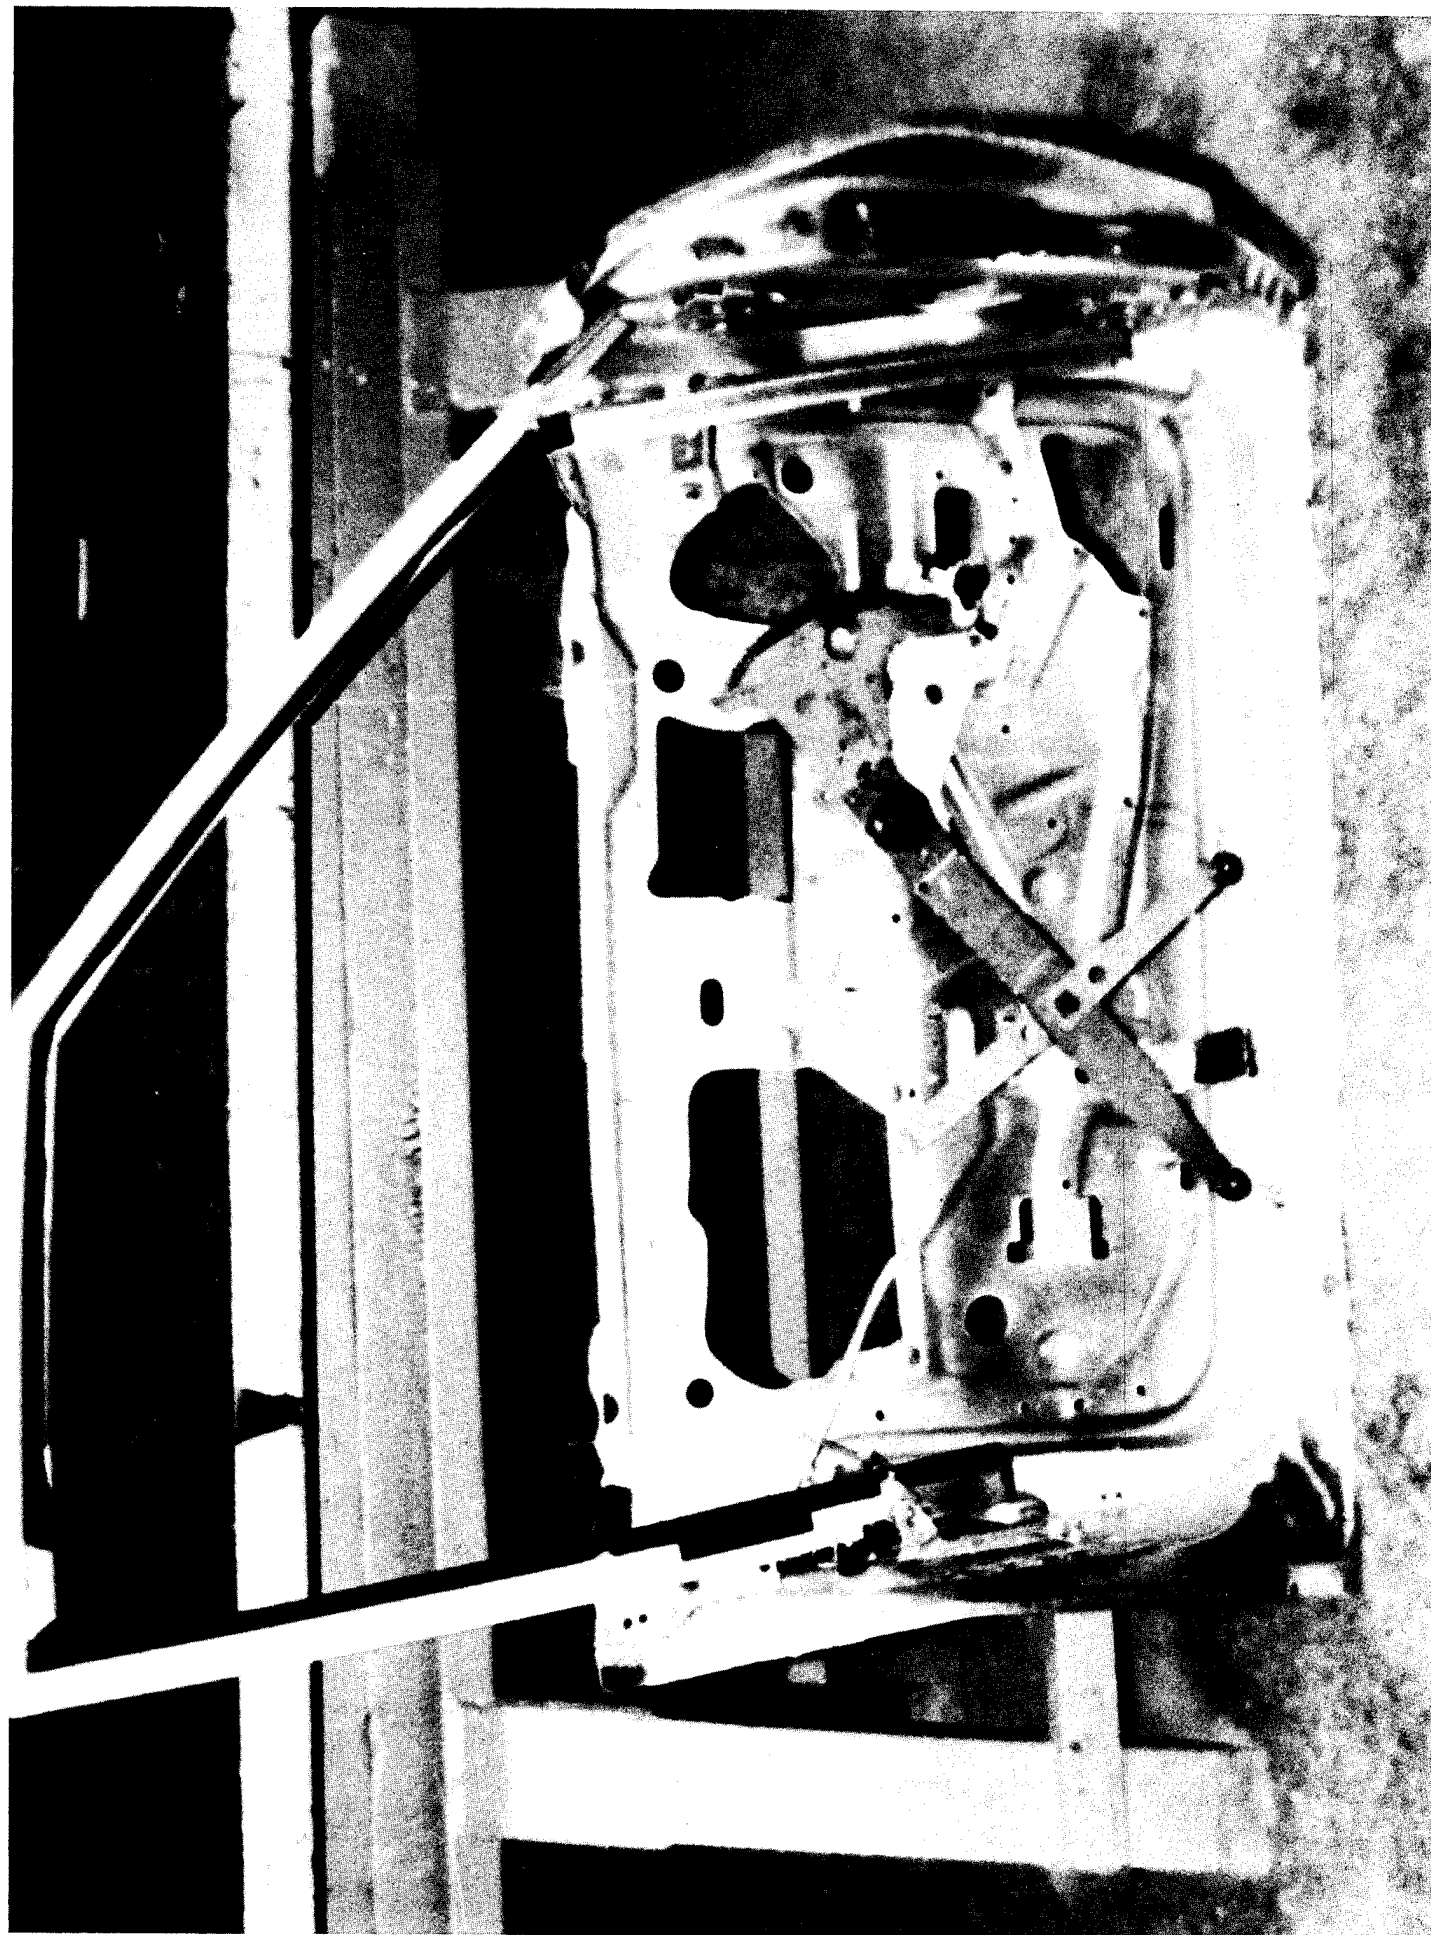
IMPALA DOOR AFTER REMOVAL OF OUTER SKIN AND INTRUSION BEAM
